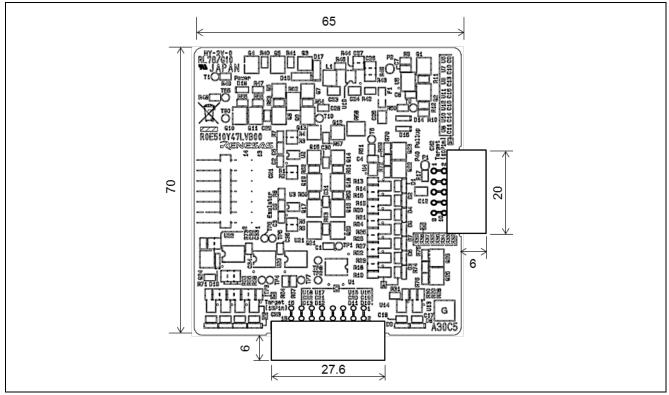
Dimensions of this product (R0E510Y47LVB00)
